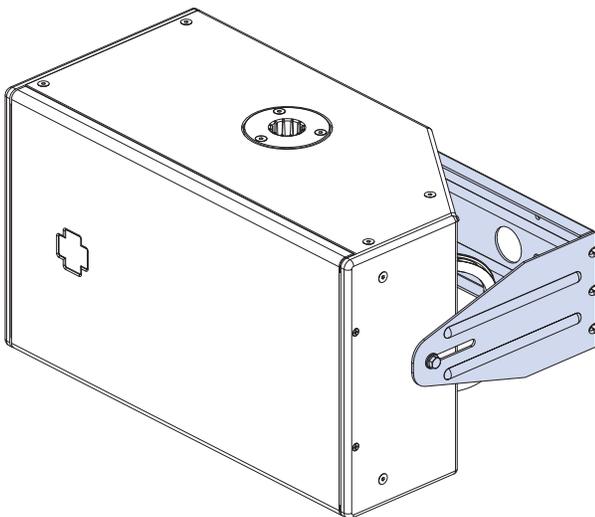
MUB-USW-112 Wall Mount, Horizontal
